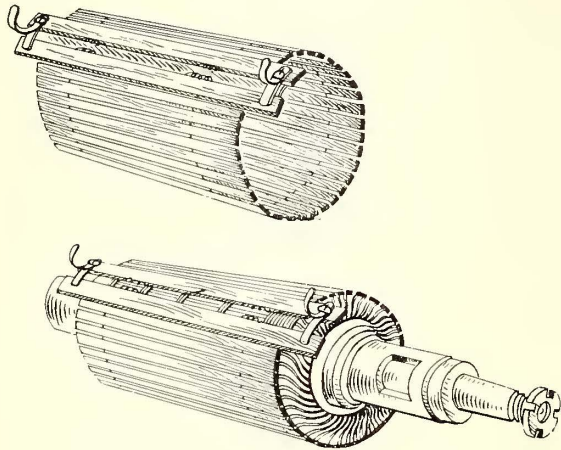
JACKET FOR PROTECTING ARMATURES IN TRANSIT
